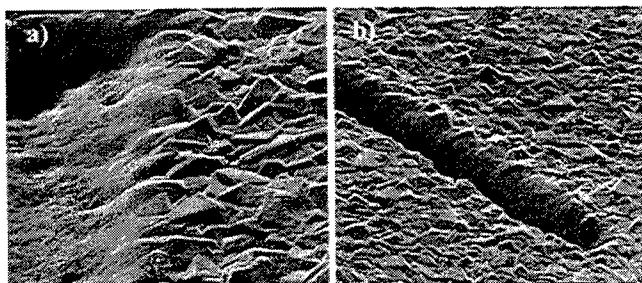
Machining of diamond: (a) surface smoothing, (b) cutting of CVD- sample
